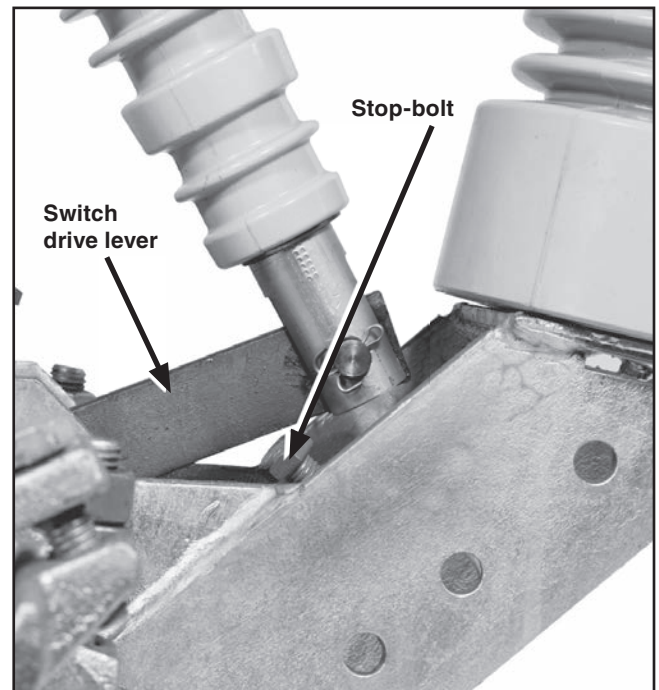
Verifying the switch drive lever assembly is within $\frac{1}{16}$ -inch (2 mm) of the closed stop-bolt.
